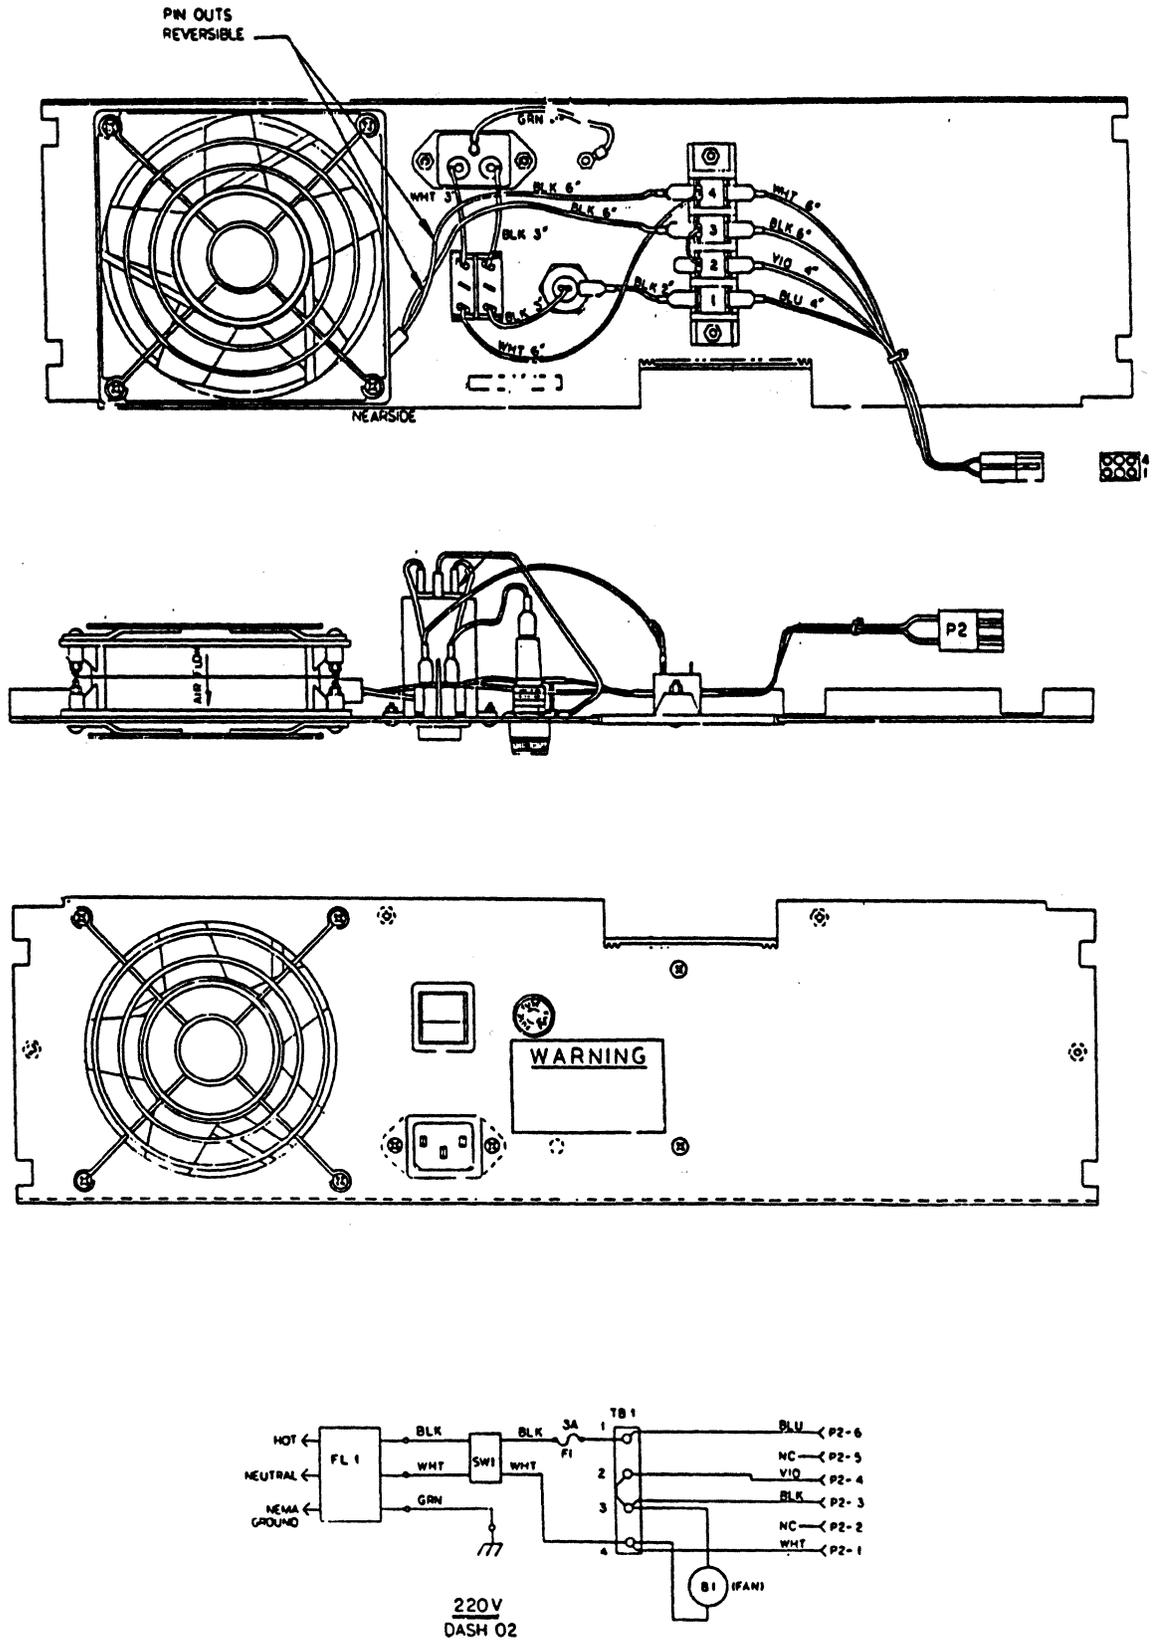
Rear Panel Assembly (Sheet 2 of 4)
